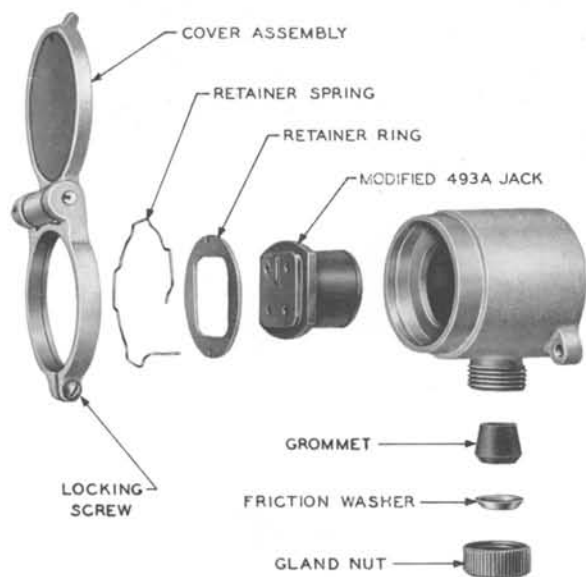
ASSEMBLY OF KS-16151, LIST 1 JACK
